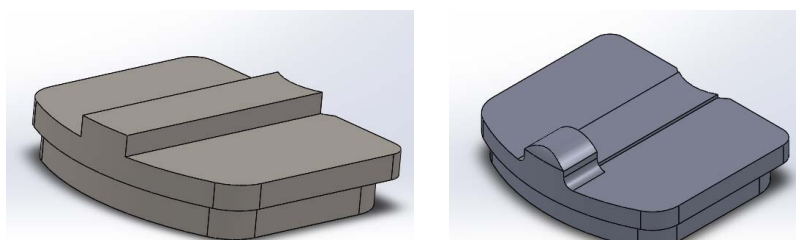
On the left is design 1 and on the right is design 2 of knee implant mobile bearing
